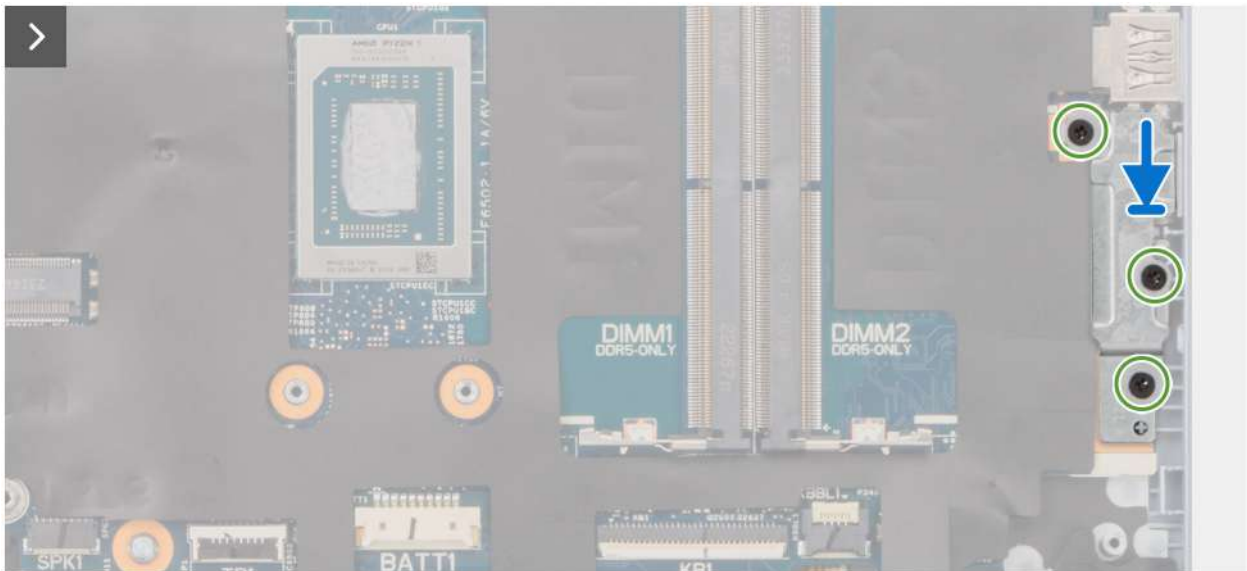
Installing the system board (for computers shipped with a plastic chassis)
